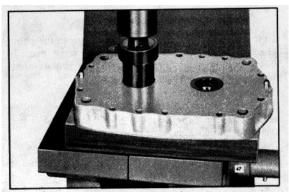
Removing Oil Seal and Bearing from End Plate with Tool J 6270-3
